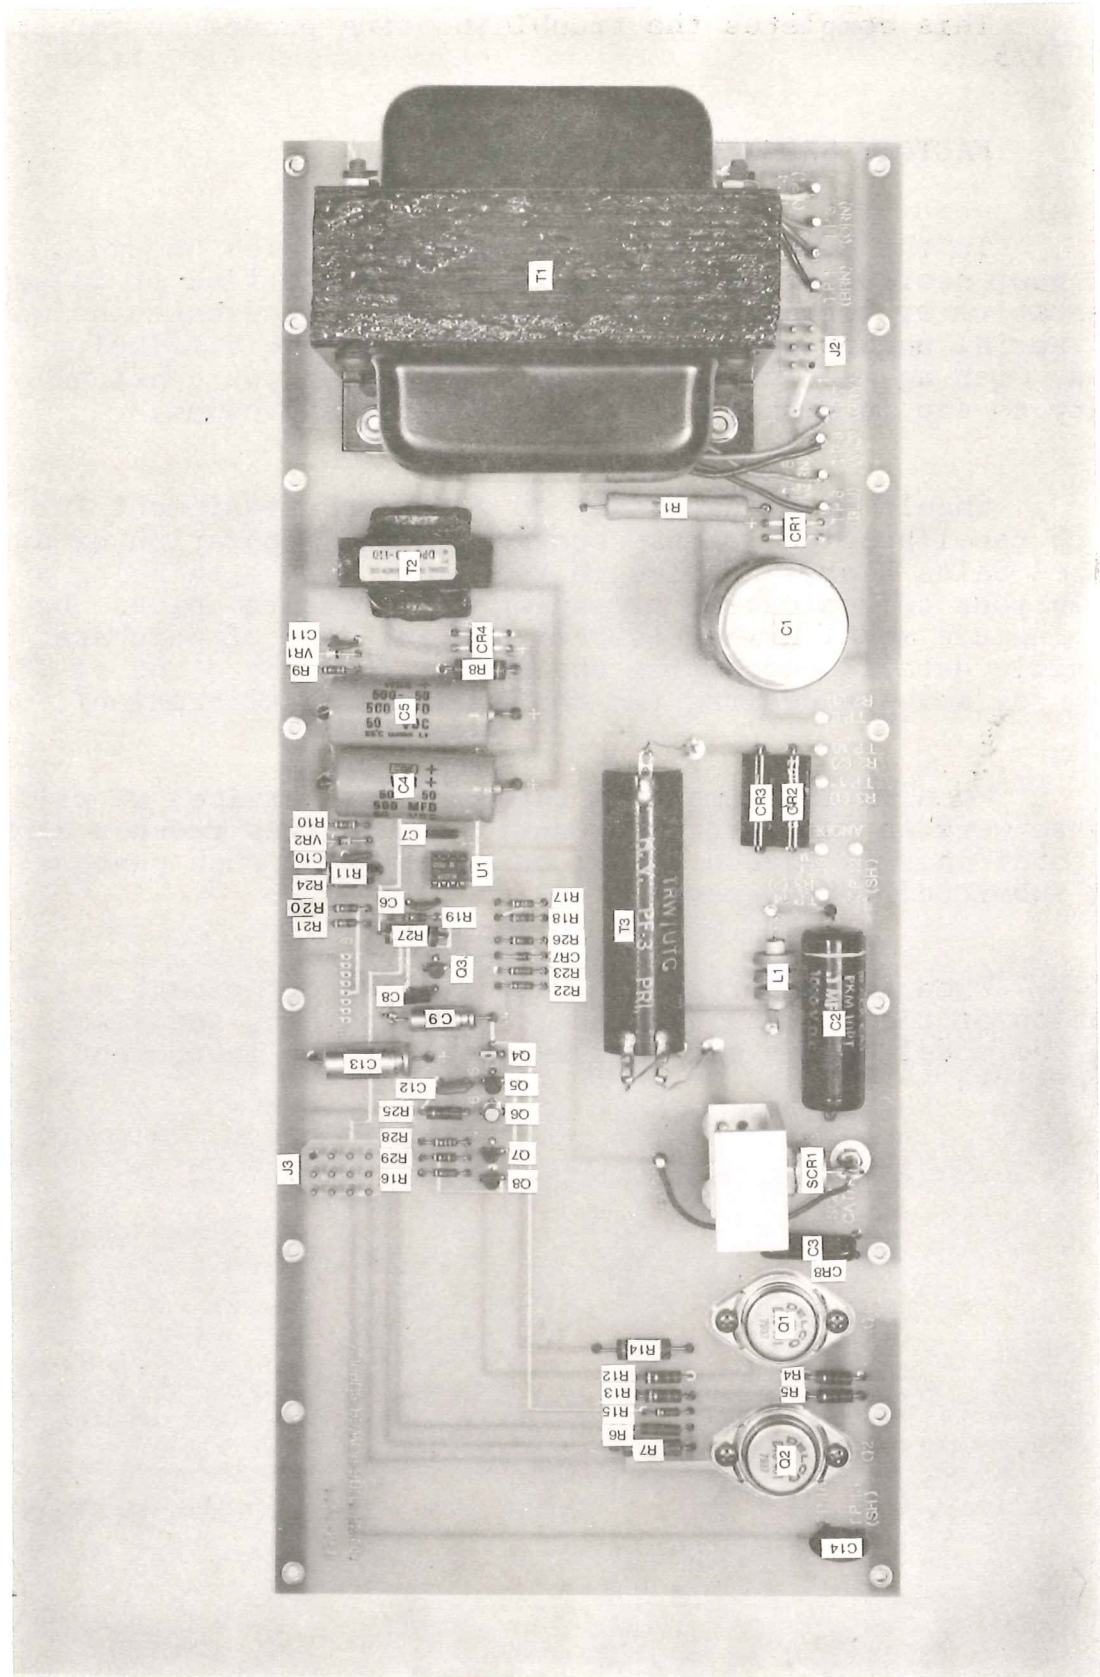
COMPONENT LAYOUT, MAIN BOARD
